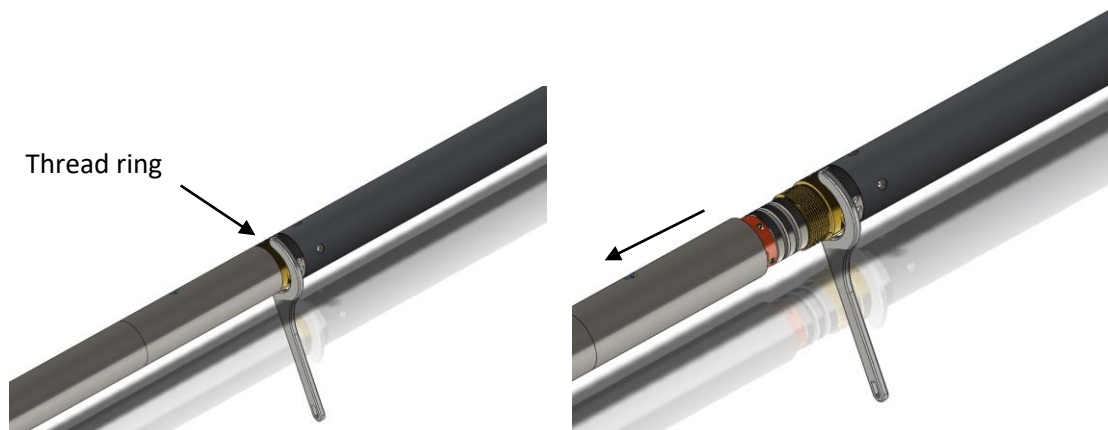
Unscrewing the thread ring and removing the bottom sub
